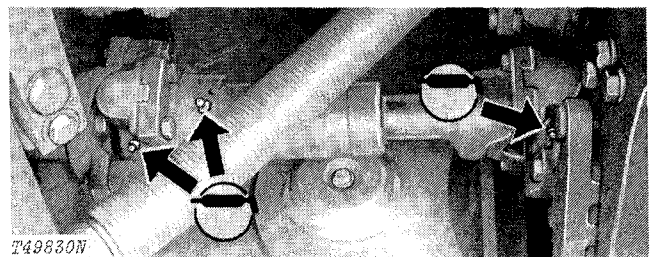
Lower Telescoping Universal Joints (3 Points)
